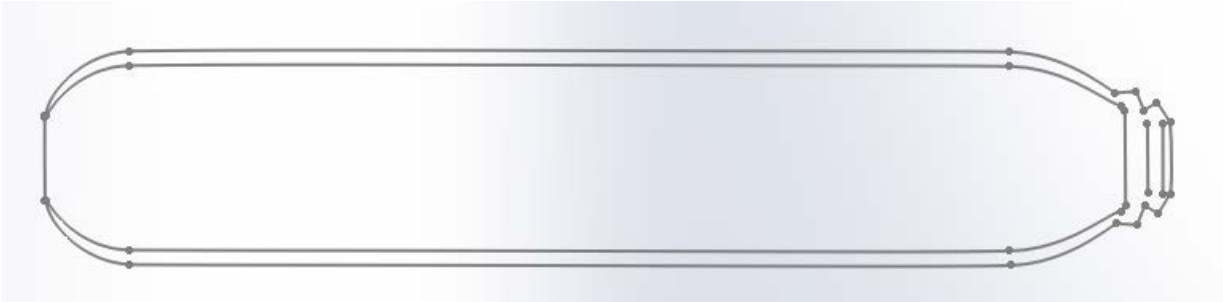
Outline of the foot. The top of the foot would be on the right of this outline.
